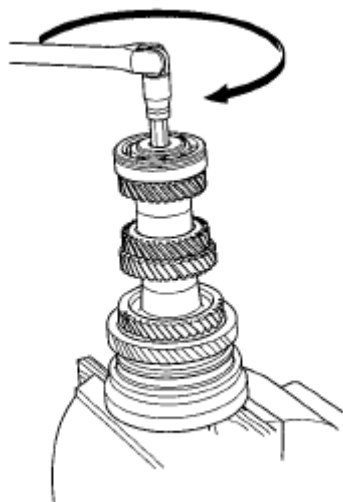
Identifying Countershaft Assembly In Bench Vise
